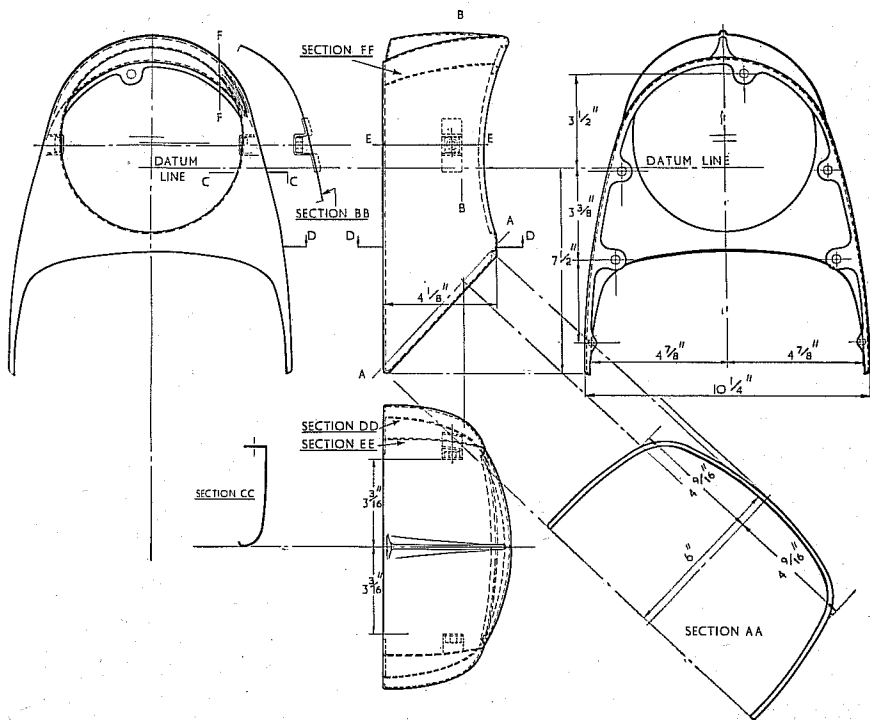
(right).—Drawing of headlamp cowl (22-gauge deep-drawing steel)
